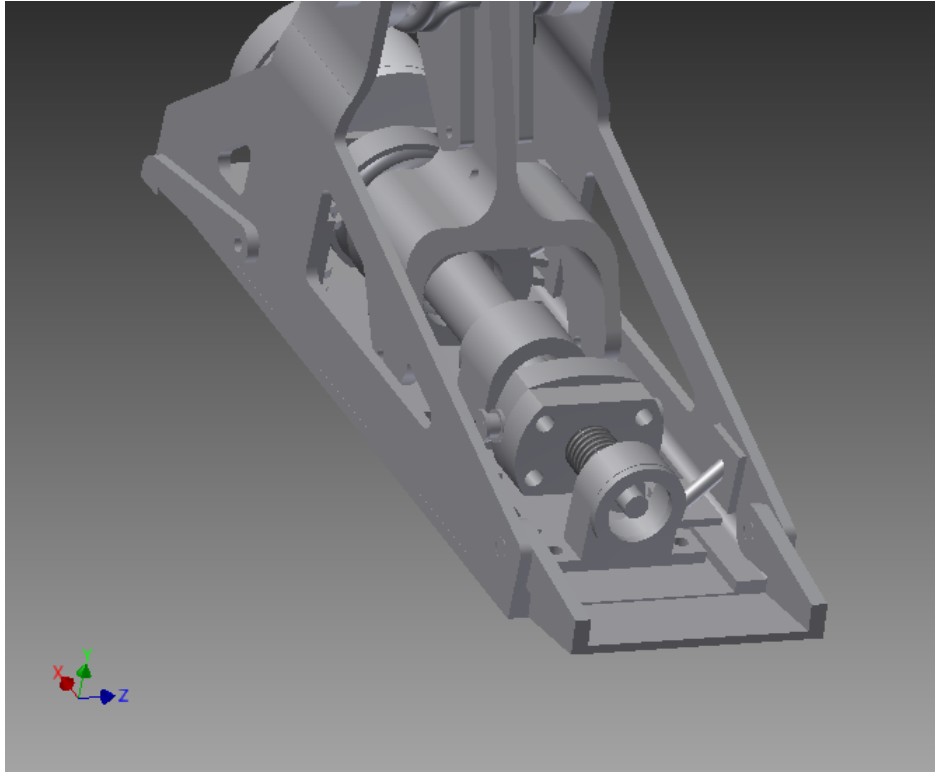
Toe joint and heel sensor plate are placed at the front and the back of the prosthesis.
